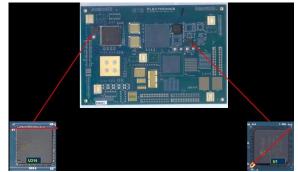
Location of QFN/BTC and BGA Cross-Sectioned
